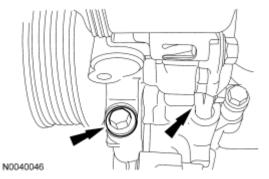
Locating Power Steering Pump And Lower Bolt Courtesy of FORD MOTOR CO.
